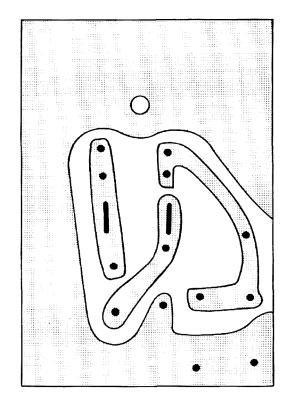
42% printed circuit layout; refer to the schematic and picture for parts placement.
